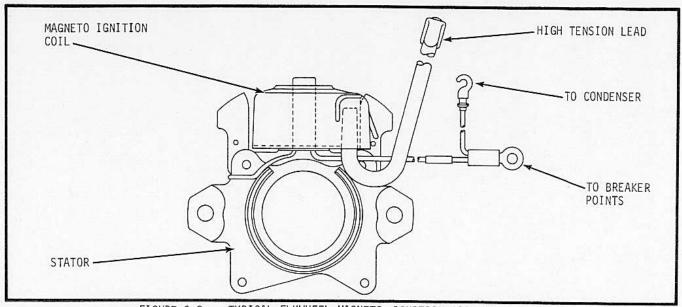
TYPICAL FLYWHEEL MAGNETO IGNITION COIL AND STATOR
